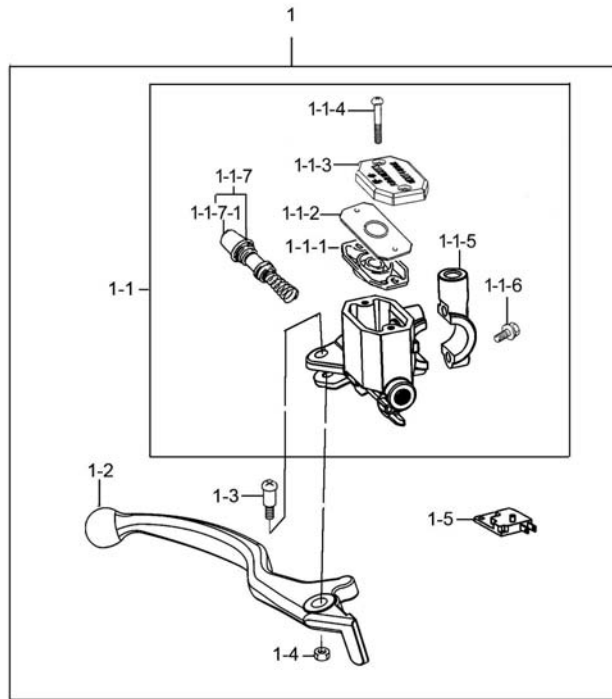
FRONT BRAKE CYLINDER (P12-S430-0005)
